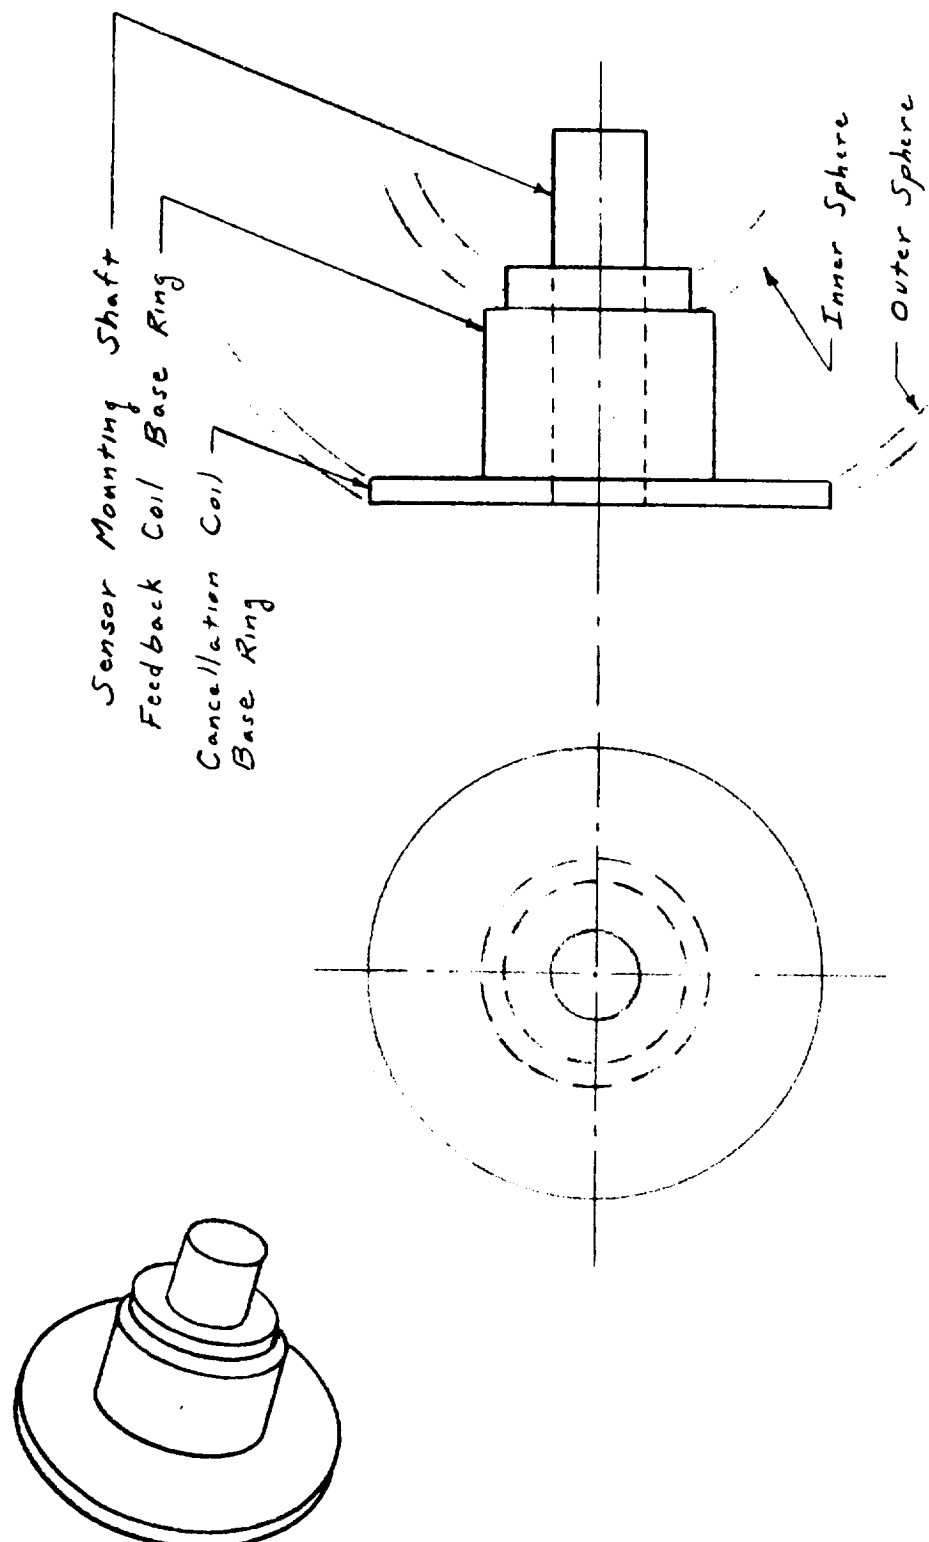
MAGNETOMETER SENSOR MOUNTING TOWER
